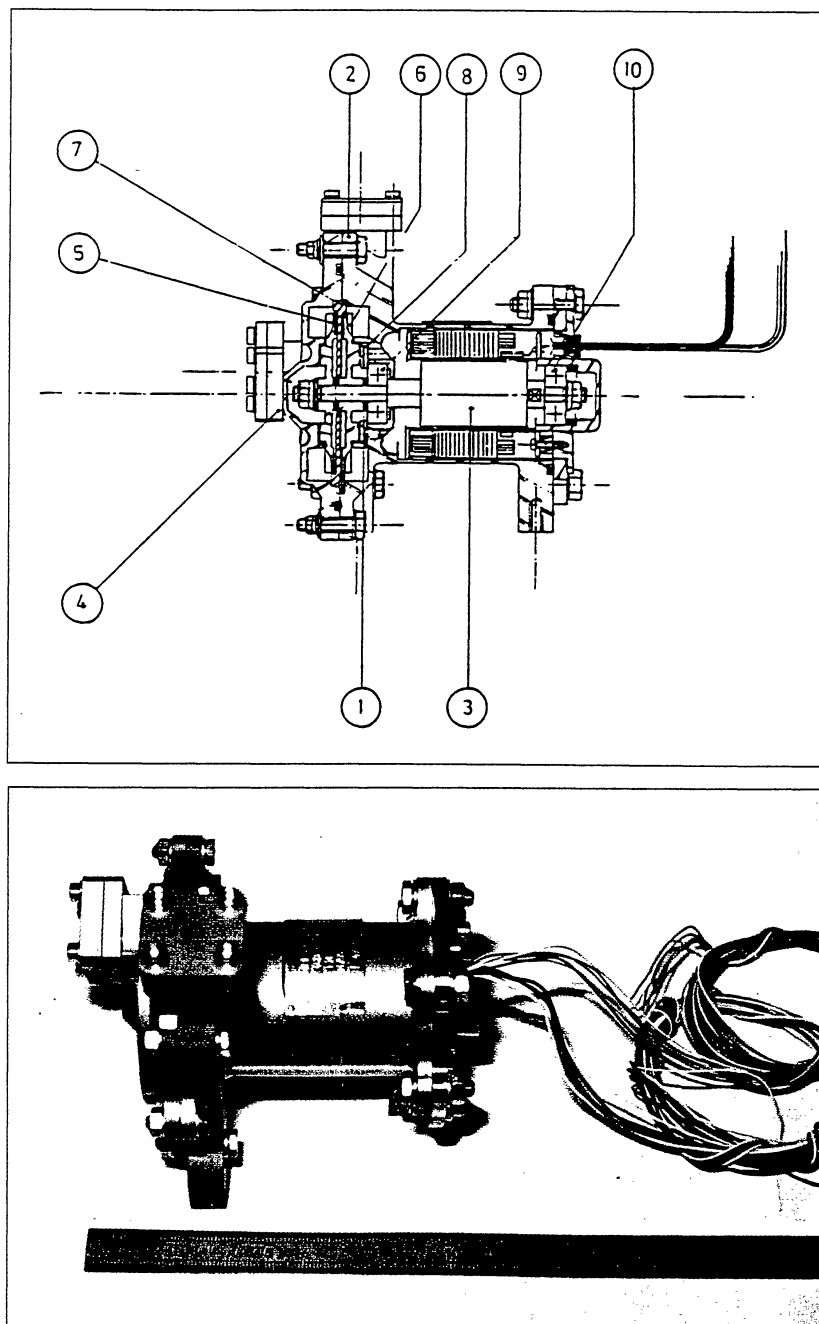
The pump unit. 1: titanium spacer. 2: second stage volute. 3: rotor. 4: first stage volute. 5: first wheel. 6: second wheel. 7: sealing plate. 8: front ball bearing plate. 9: front ball bearing. 10: rear bearing.
